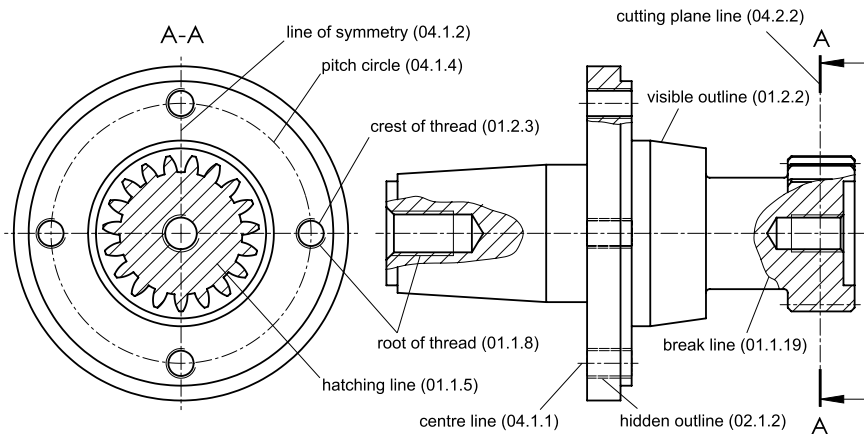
Examples of line types in a technical drawing of a tapered shaft.
